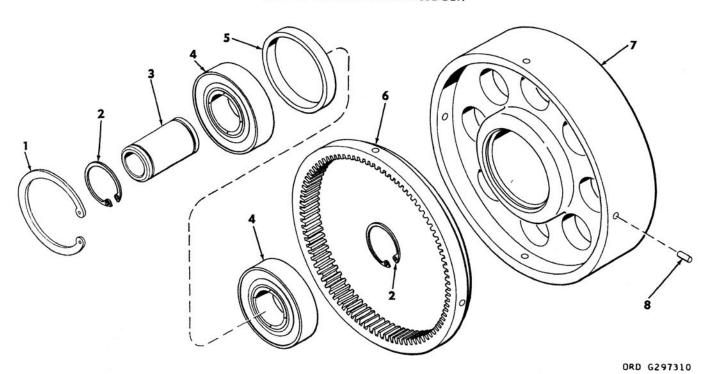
WHEEL ASSEMBLY /8167435/ /SEE FIGURE 8 FOR NEXT HIGHER ASSEMBLY/
